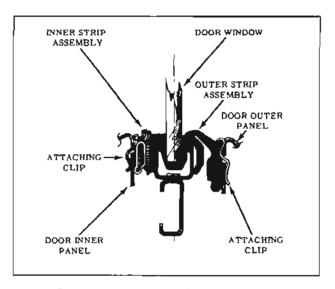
Glass Run Channel Inner and Outer Assemblies
